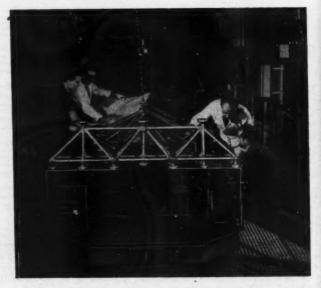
Checking one of the trolley jigs used on the closed-loop body line. The spotting jig employed is mainly of tubular construction, for lightness, and is stored in an enclosure at one end of the loop-line
